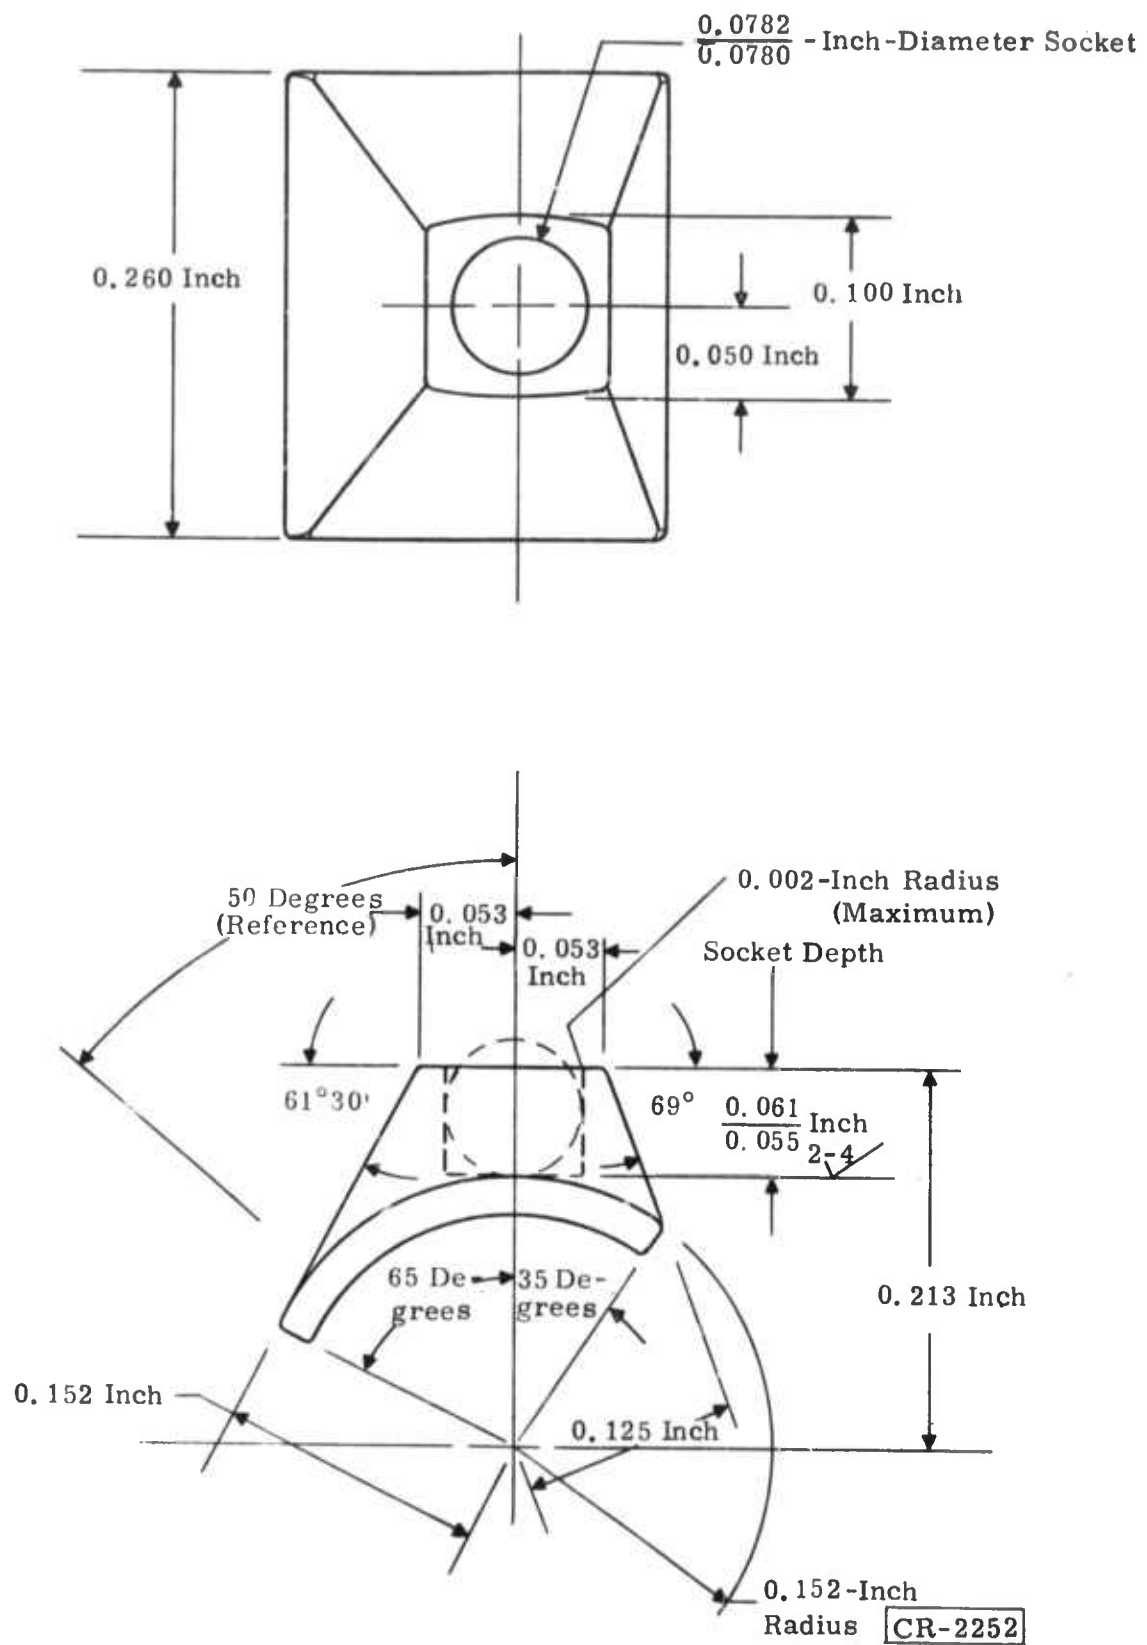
Tiny Tim Kentanium Tilting Pad Journal Bearing
